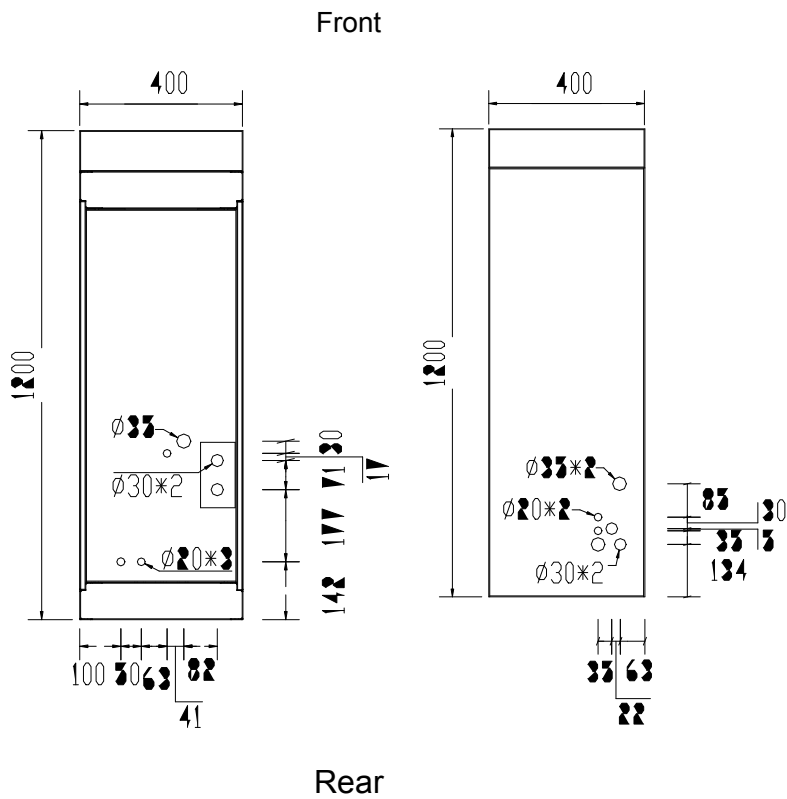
Dimensions of the Top Panel and Bottom Panel in 400mm side discharge unit (Left- Top Panel; Right- Bottom Panel)
